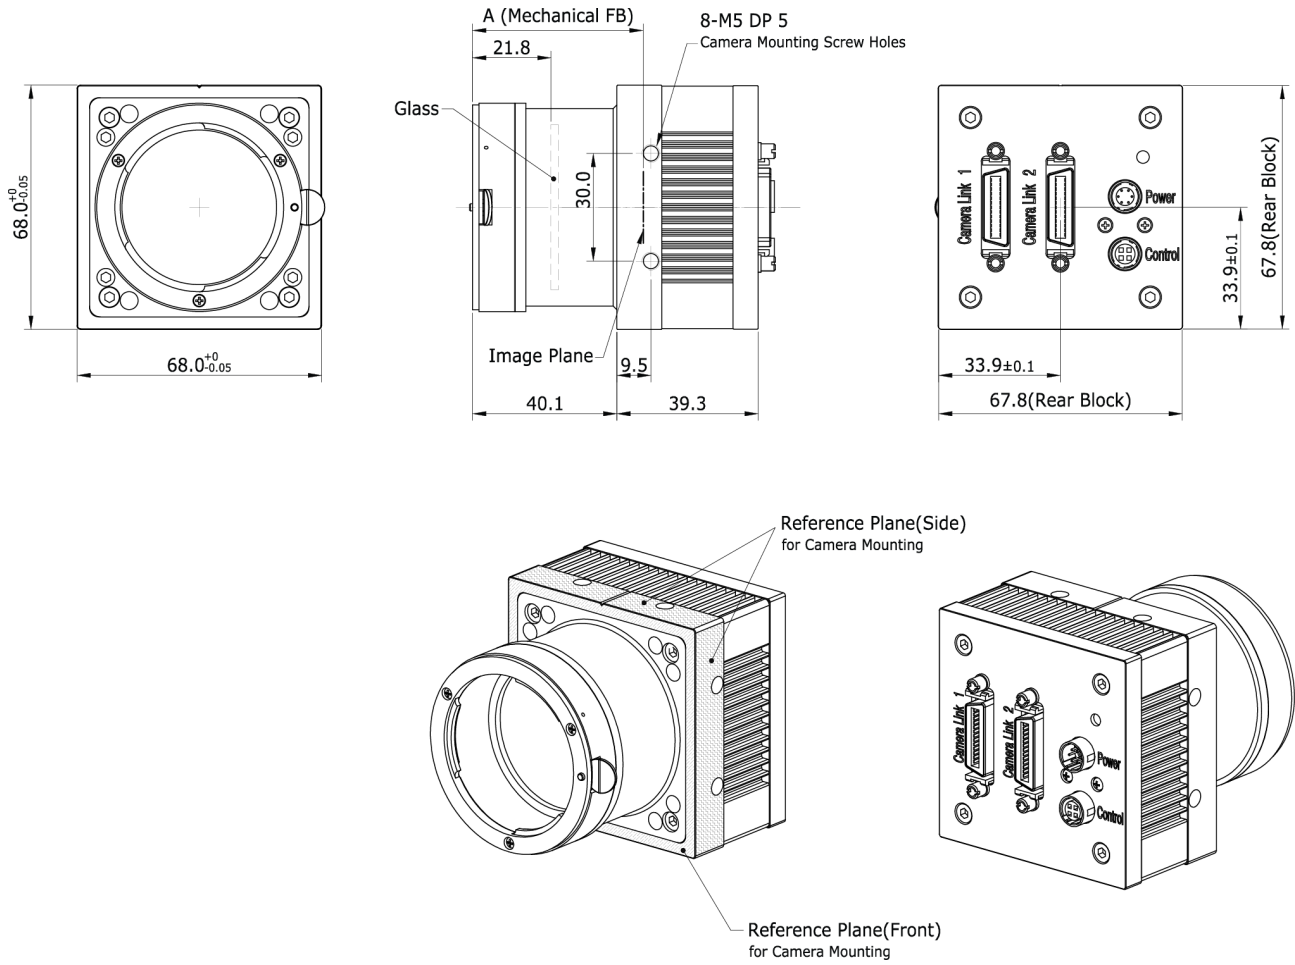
VC-2MC/3MC/4MC Camera Link F-mount Mechanical Dimension
